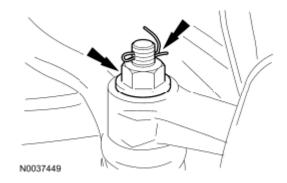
Locating Tie-Rod Ends Nuts And Cotter Pin Courtesy of FORD MOTOR CO.
